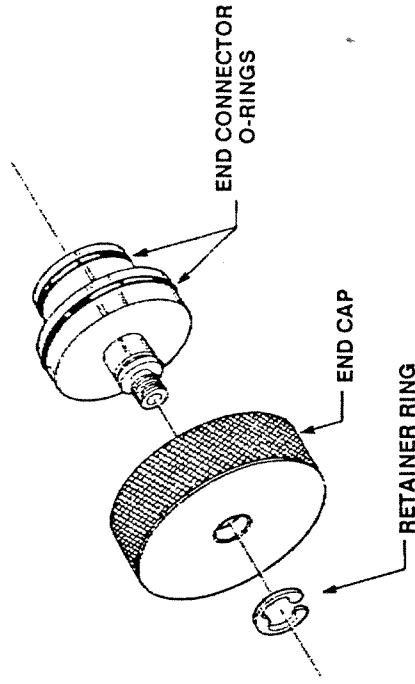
REPLACING THE END CONNECTOR O-RINGS
